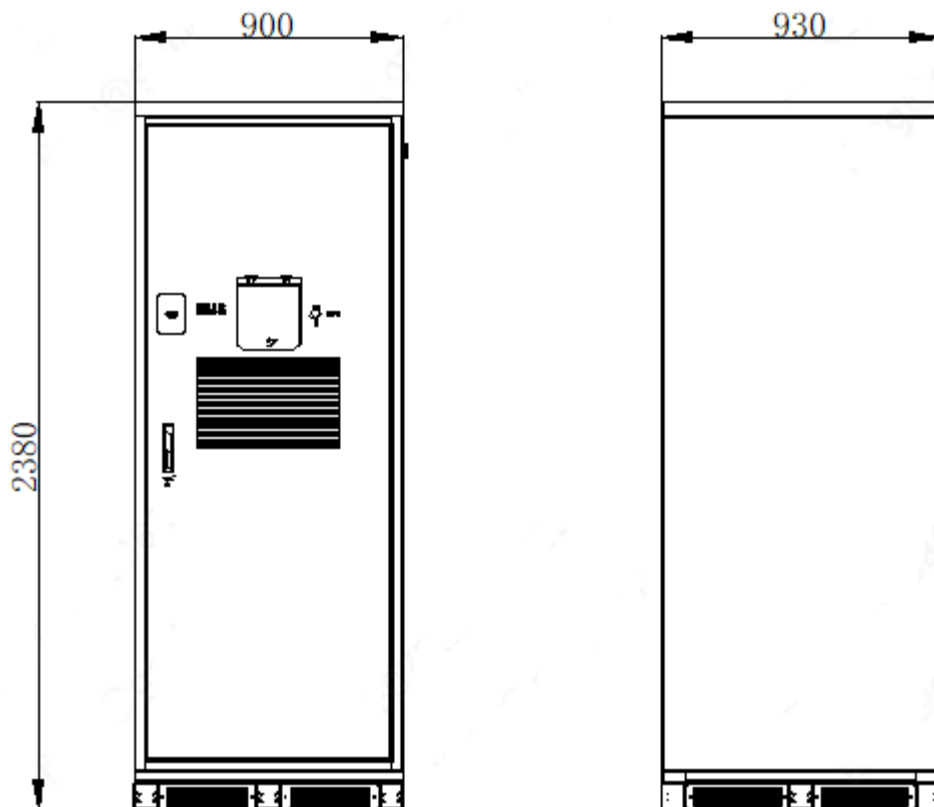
Dimensional drawing of STS100DD static transfer switch cabinet
